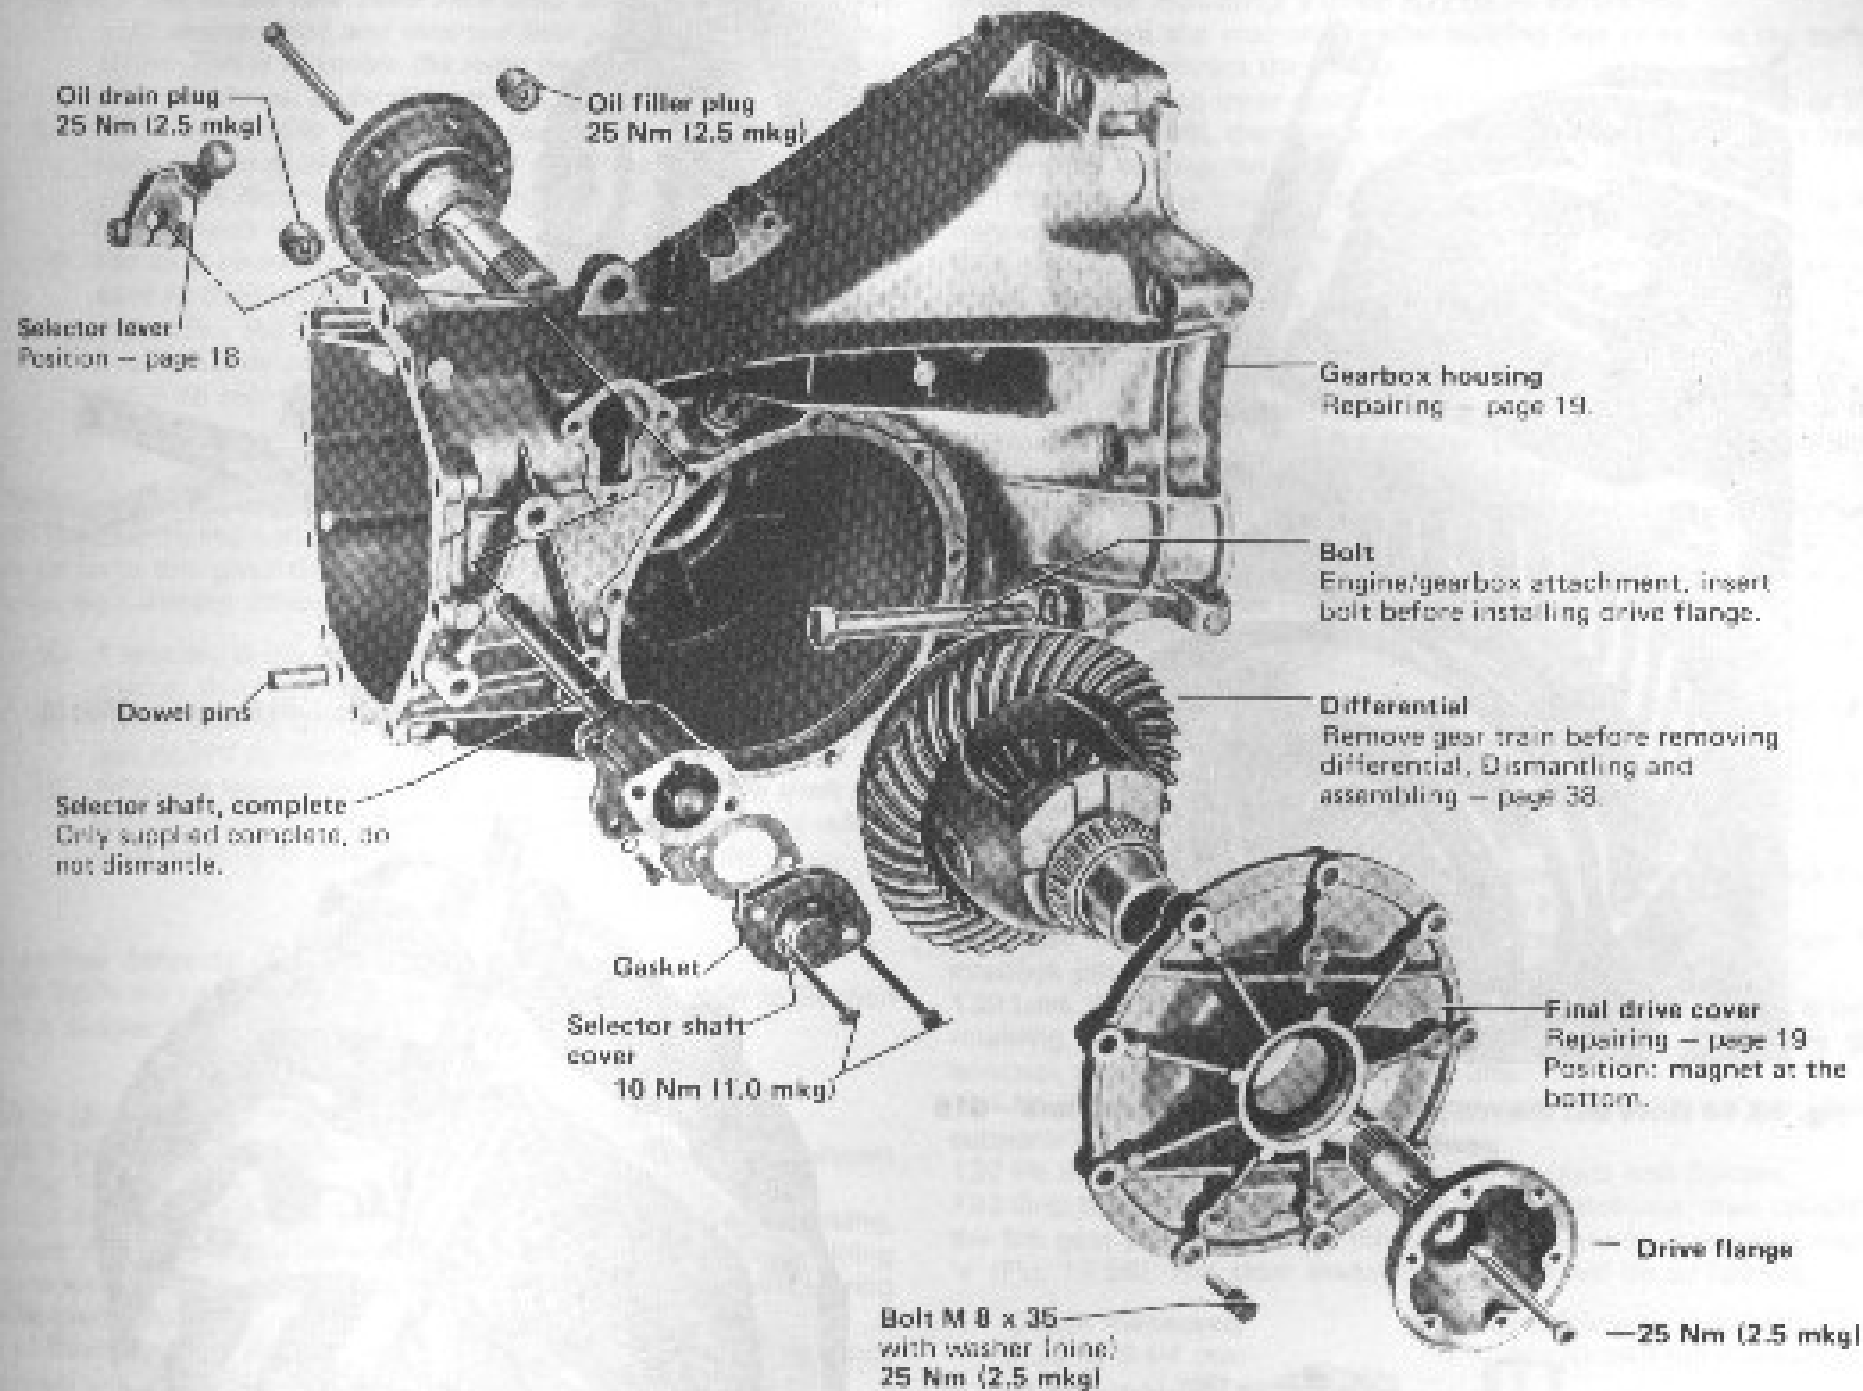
(b) Exploded view of 016 gearbox components (Sec 8)
